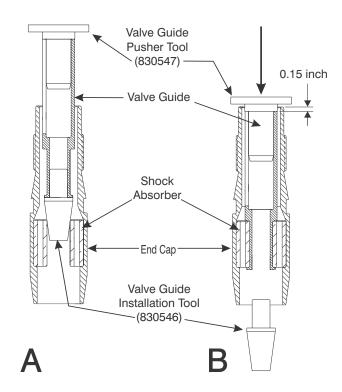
Press The Valve Guide into The Shock Absorber.
